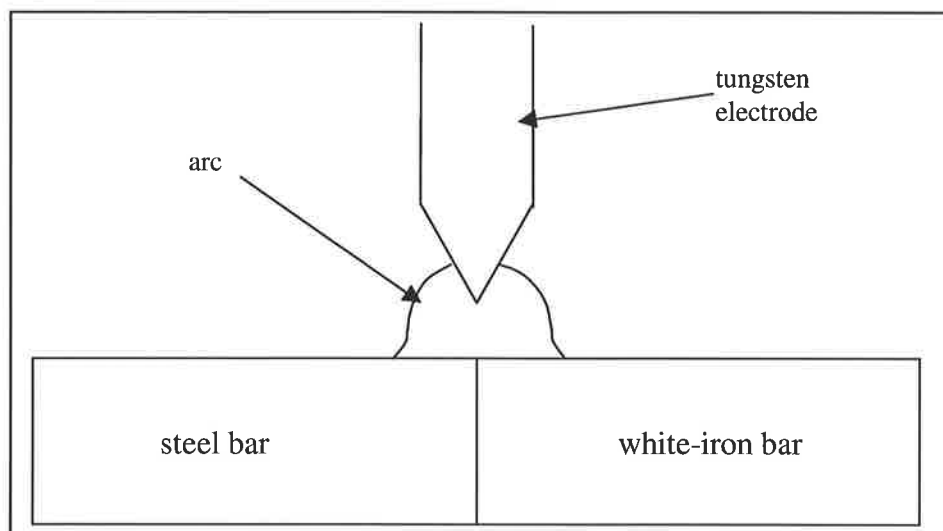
Schematic representation of the GTAW welding experiments.
